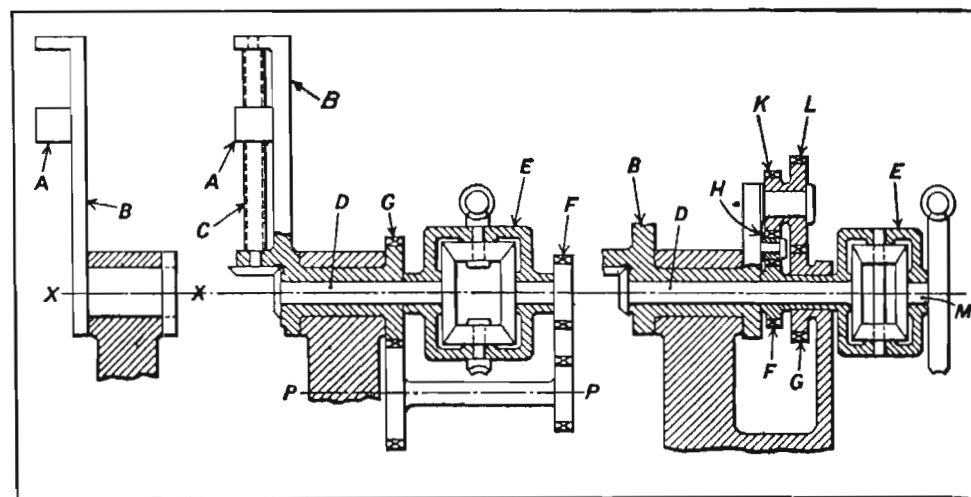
(Left) Section of Mechanism that is Required to Have the Throw of Block *A* Adjusted while Arm *B* is Rotating. (Center) Sectional View of Mechanism Designed for Adjusting Throw of Block *A*. (Right) Sectional View of Alternative Throw-adjusting Arrangement.
